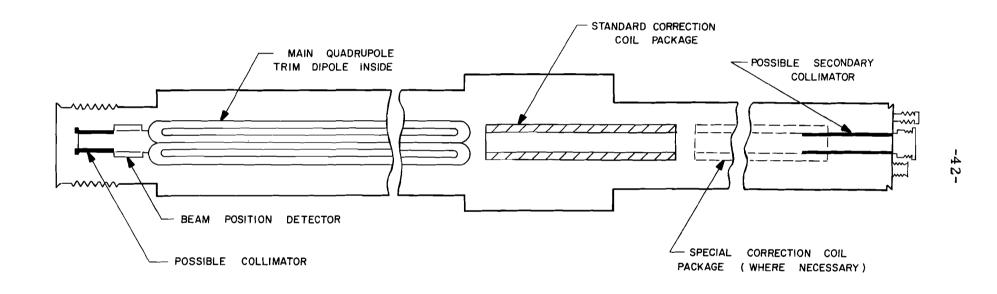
Longitudinal cross section of quadrupole and correction coil assembly.
